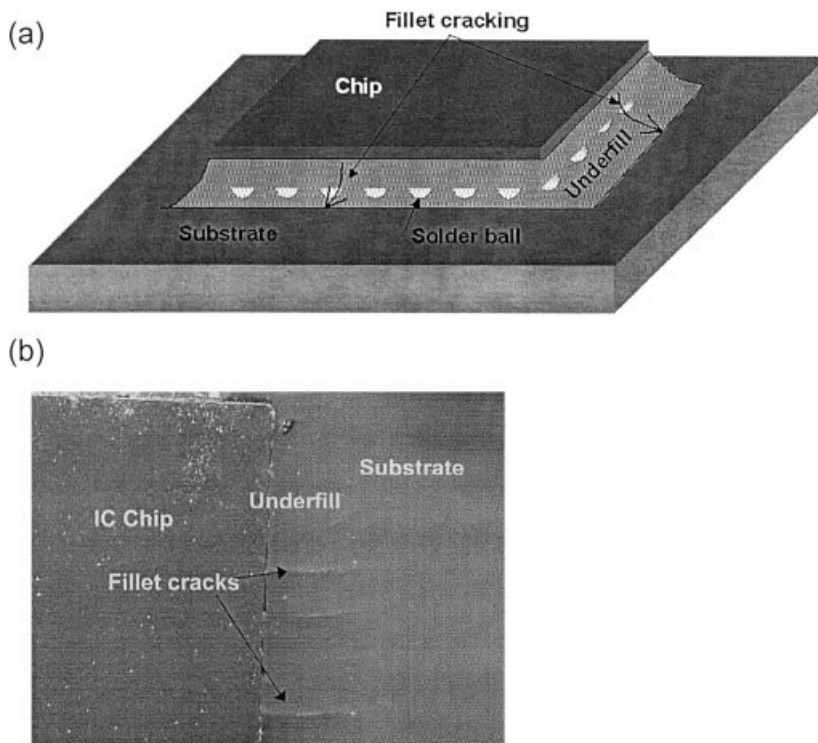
Typical fillet cracking of underfill in a flip-chip device: (a) side view and (b) top view.
